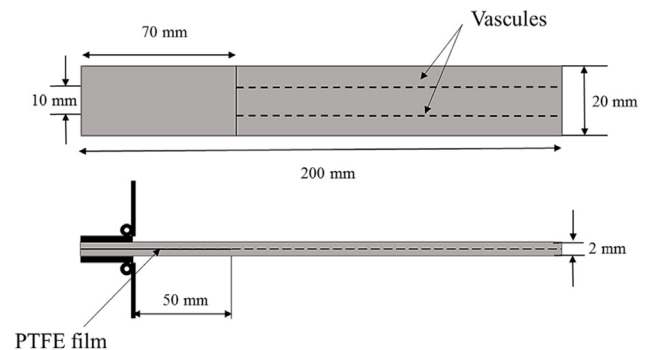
Double Cantilever Beam (DCB) coupon specimen geometry.
